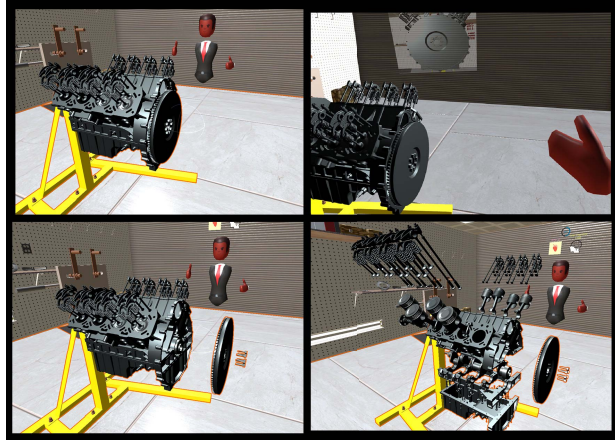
Tasks, clockwise from top, the engine assembly before operation. b) instruction on which part to remove. C) the corresponding part removed. d) Engine with components taken apart.
